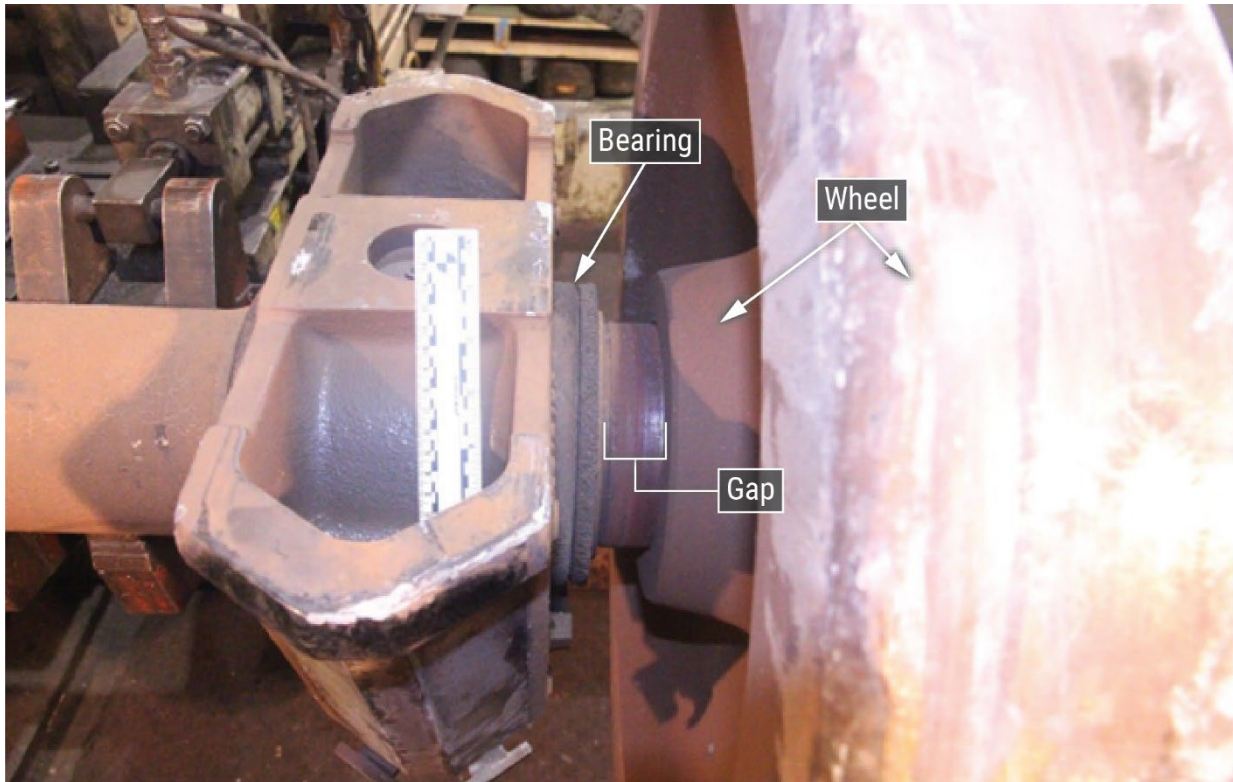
Gap between the right-side wheel and bearing on wheelset #4.
